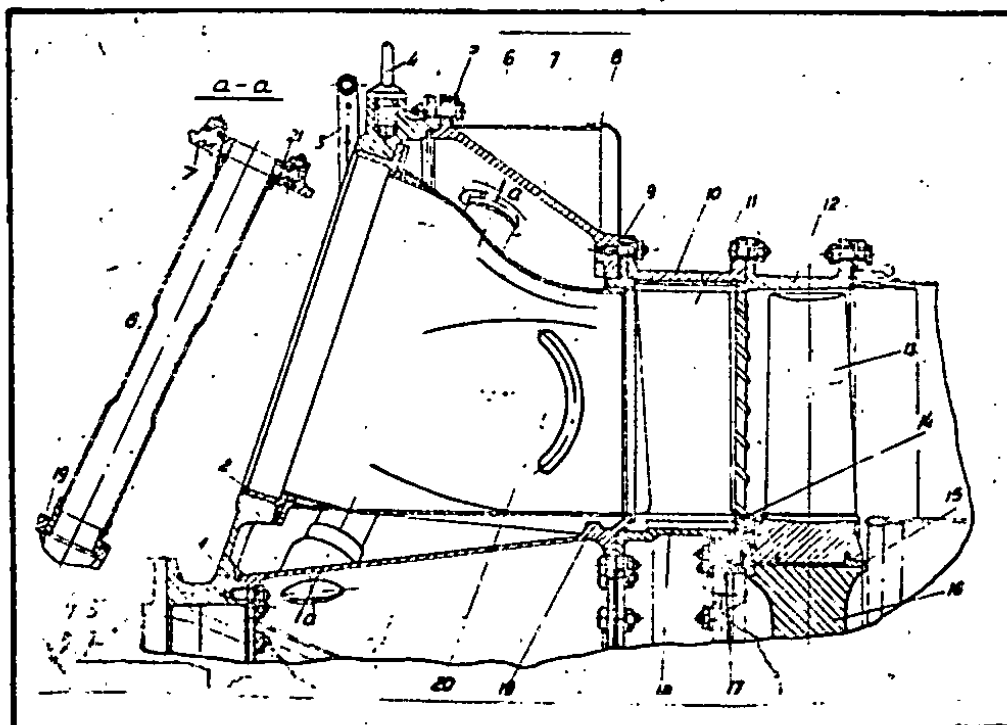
Gas Nozzle Box with Nozzle Guide Vanes.
